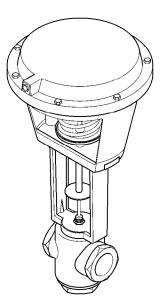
Typical MK-68X1 Series Actuator Using the AV-430 Valve Linkage.
